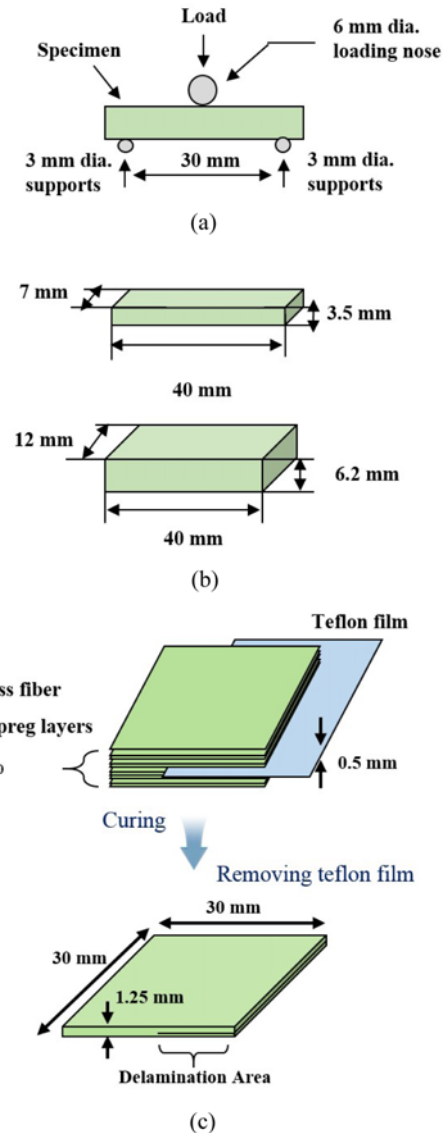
A schematic diagram of GFRP specimen preparation: (a) Experiment condition of short-beam test, (b) Geometry of short-beam test specimens, (c) Manufacturing process of delaminated GFRP specimen
